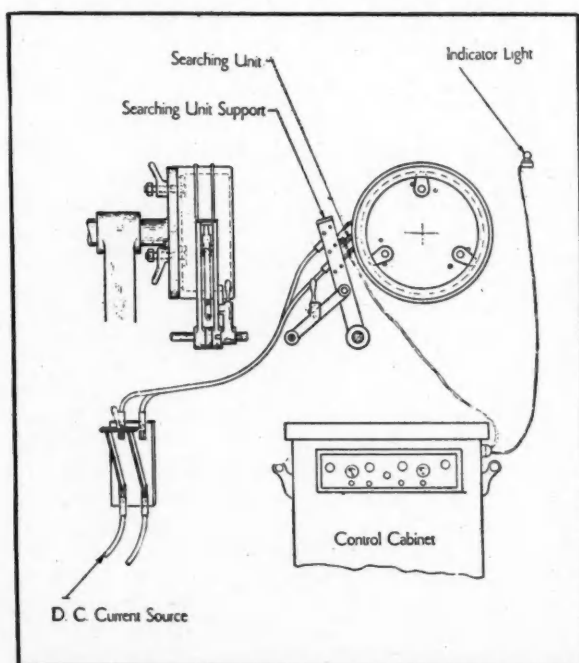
Sperry electrical flaw detector locates bad section in a specimen of bar stock for an axle shaft. Cupping, which would have caused failure in service, is discovered upon breaking the bar at the point indicated
